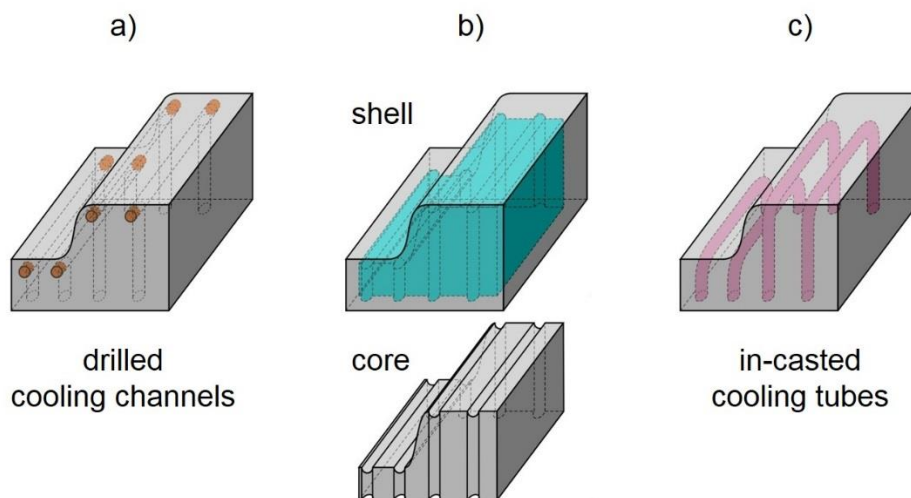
Cooling strategies for hot stamping tool: a) one-part with drilled cooling channels, b) two-parts with shell and core segment, c) one-part with in-casted cooling tubes.
